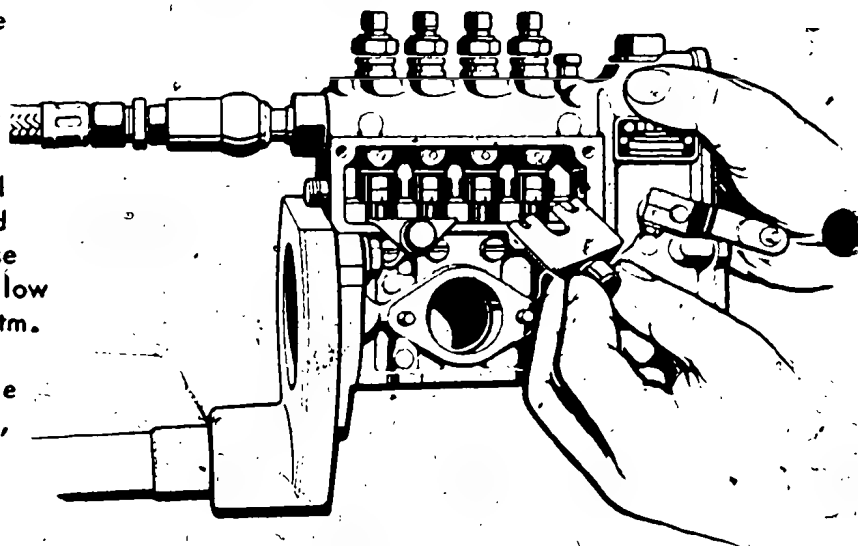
The holding plates EFEP 309 are used for the tightness test
